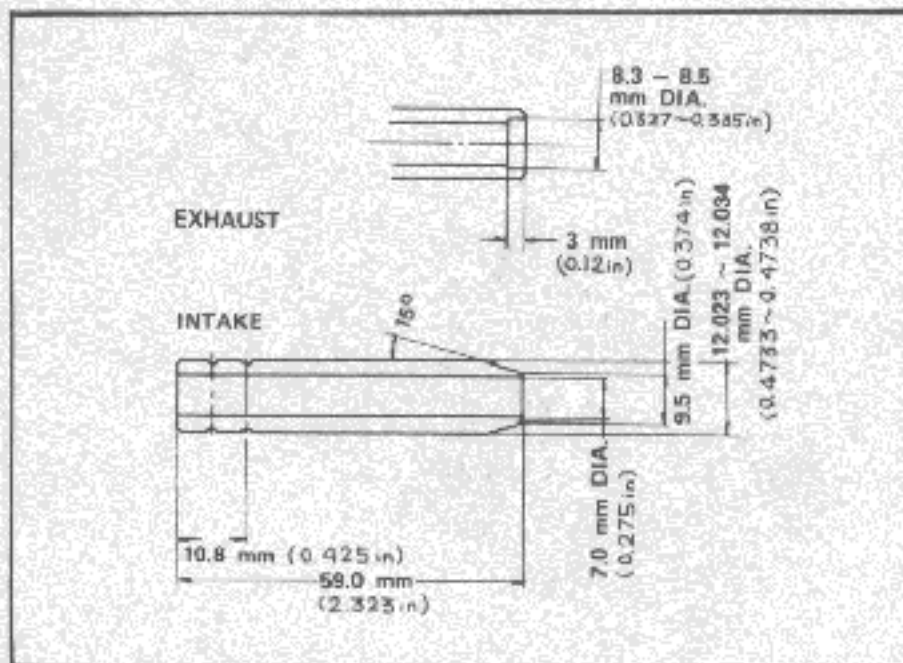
Standard valve guide (L13 and L16 engine)
